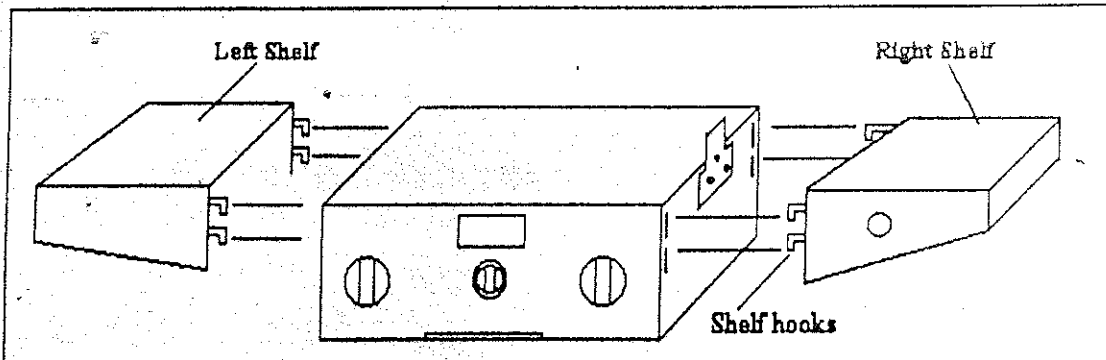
Attach Left Shelf and Right Shelf to the appropriate side of the grill body by inserting shelf hooks into the side of the grill and pushing down on the shelf assembly.
